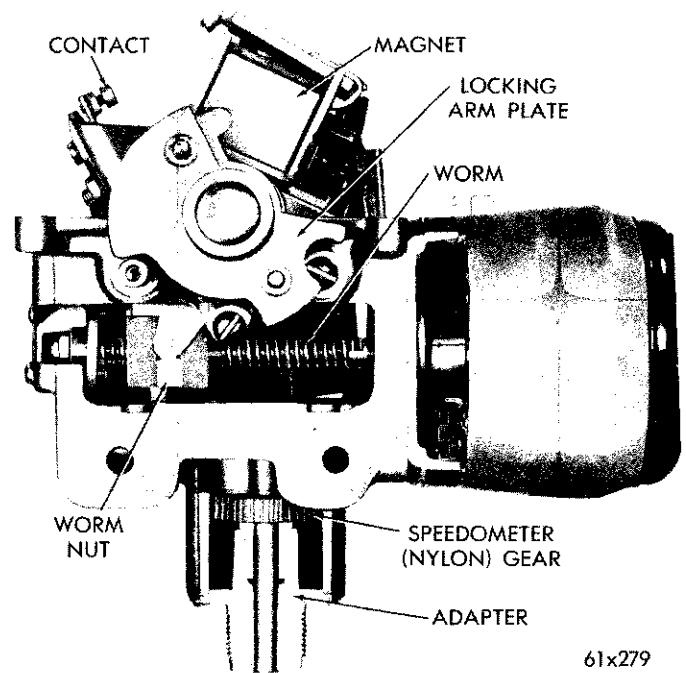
Driving Magnet Assembly with Worm and Worm Nut
